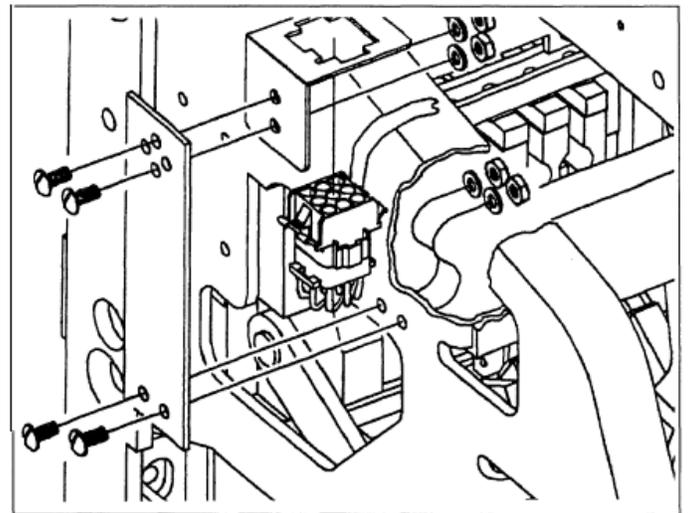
Mounting Pattern for Types AK-50, AK-100 Breakers
